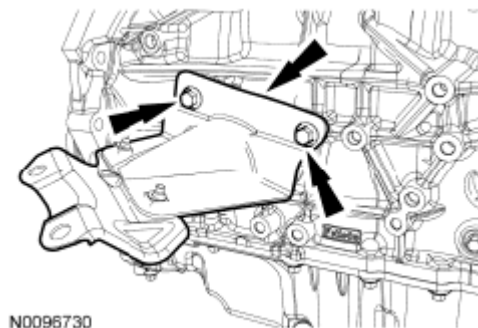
Locating Bolts & Exhaust Flexible Pipe Bracket
